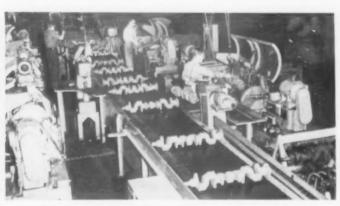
Final finishing of the crankshaft prior to shipping takes place on this 80-ft power-driven conveyor. The crankshaft is balanced, drilled and checked for proper index for machining.
